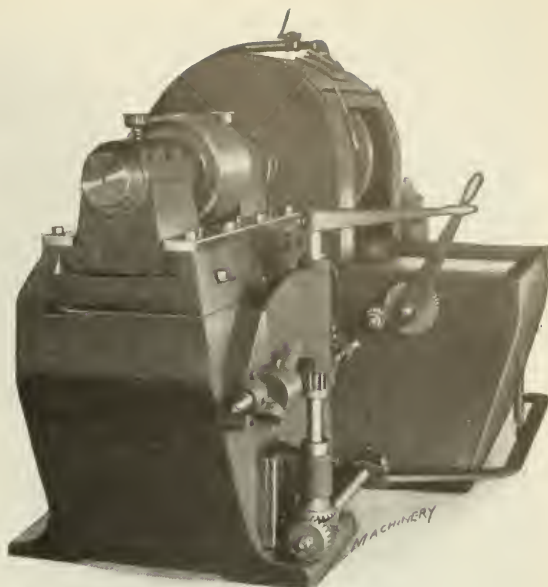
End View, showing Arrangement of Spindle Head and Sub-base
